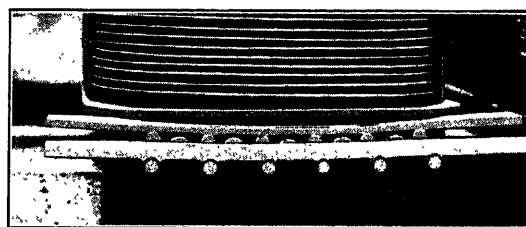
DOUBLE-DECK DAMPER CONSTRUCTION
